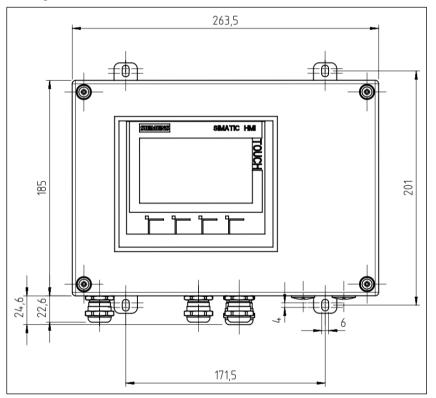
SIWAREX WT231 weighing terminal – dimensions and hole pattern
